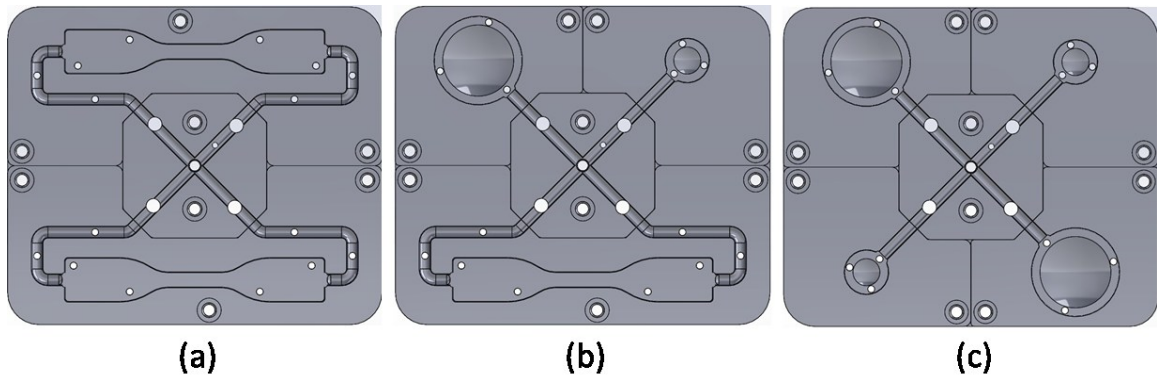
Modular Cavity Inserts Assembly - (a) Two Cavities (b) Three Cavities (c) Four Cavities
